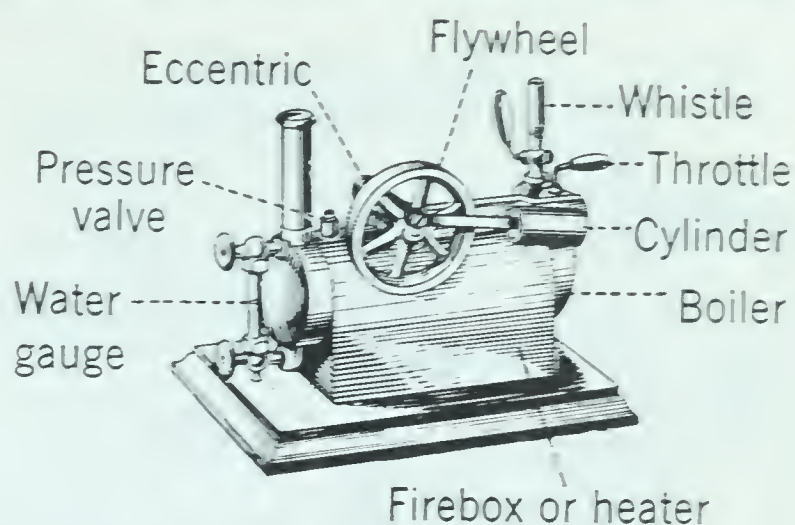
This working model illustrates the principle of a reciprocating steam engine.
